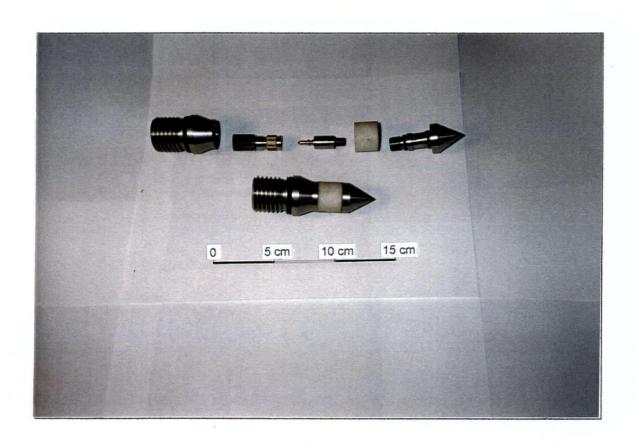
U.B.C. designed and manufactured piezometer tip assembly.
